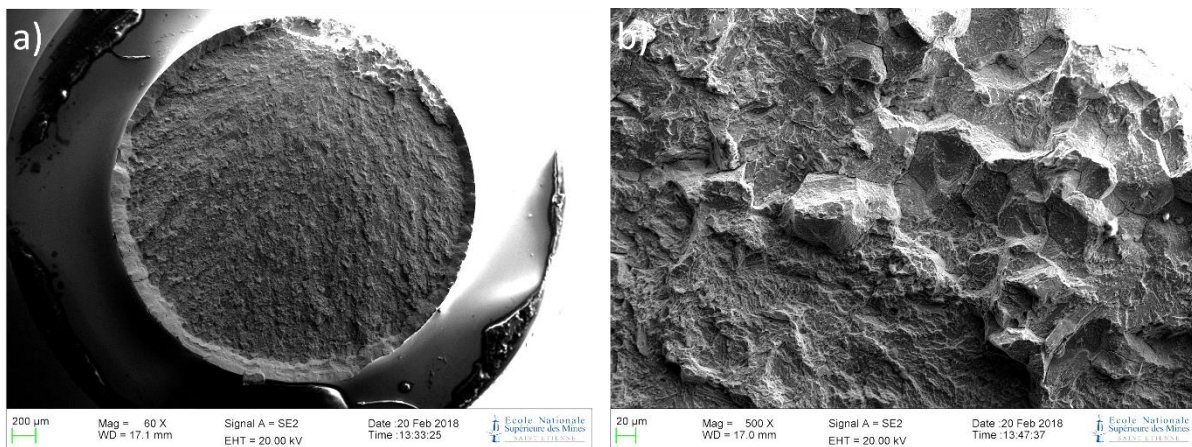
Fracture surfaces of the specimen loaded at 1500 MPa under cathodic charging of hydrogen.
